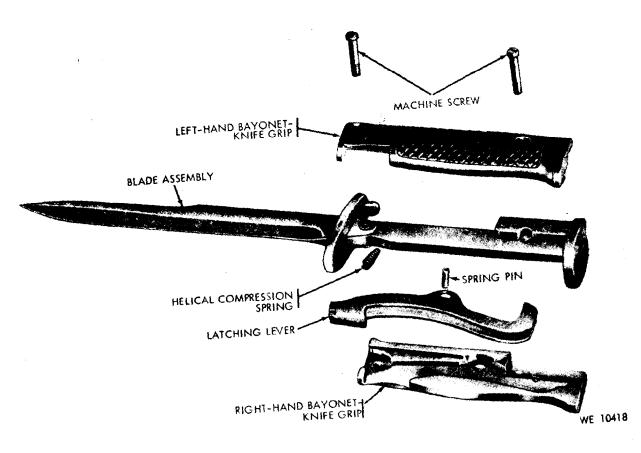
Disassembly/assembly of bayonet-knife M5A1.
